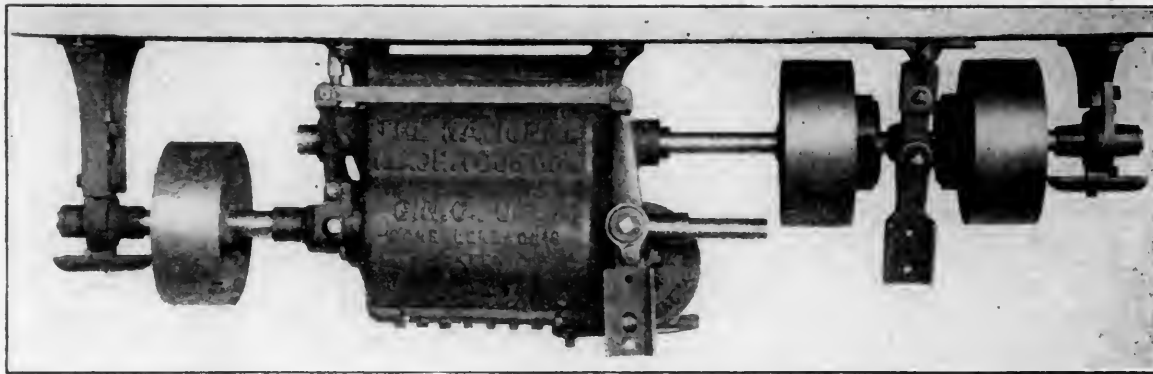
EXTERIOR VIEW OF THE SPEED "VARIATOR," AS EQUIPPED WITH REVERSING CLUTCHES FOR LATHE DRIVING.
